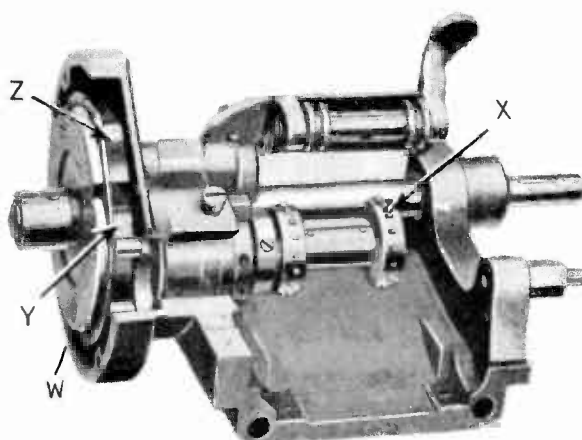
"ROLLER PIN" MOVEMENT OF POWERS PROJECTOR.
